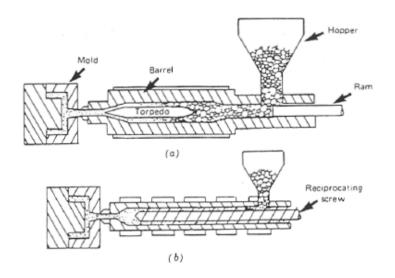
a) a ram-fed b) a screw fed injection molding machine [17].
